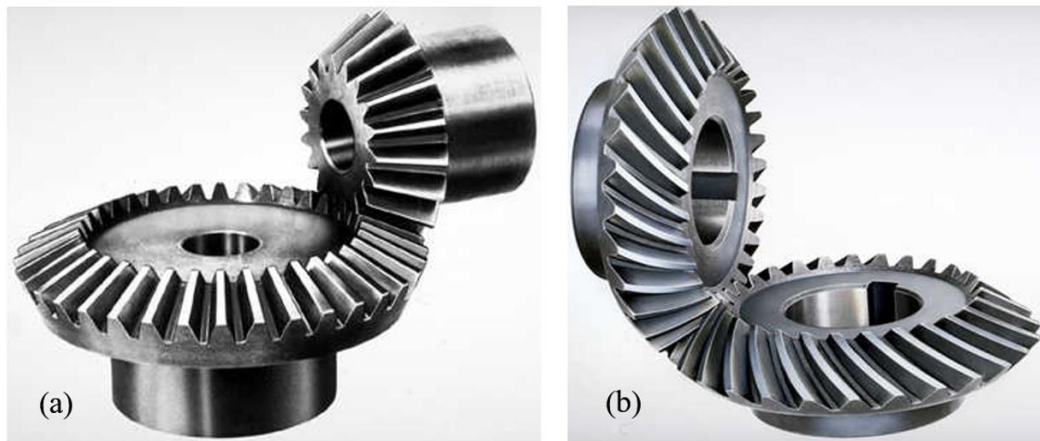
Bevel gear [11]: (a) Straight bevel gear; (b) Spiral bevel gear
